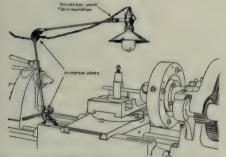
Searchlight Universal lamp bracketlathe attachment.
